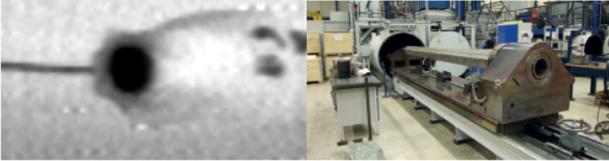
On the left the electron-optical image of a welding process clearly showing joint and keyhole, but also something of the flowing and solidification of the melt. On the right, a component is shown that can only be welded with ELO-Online.
